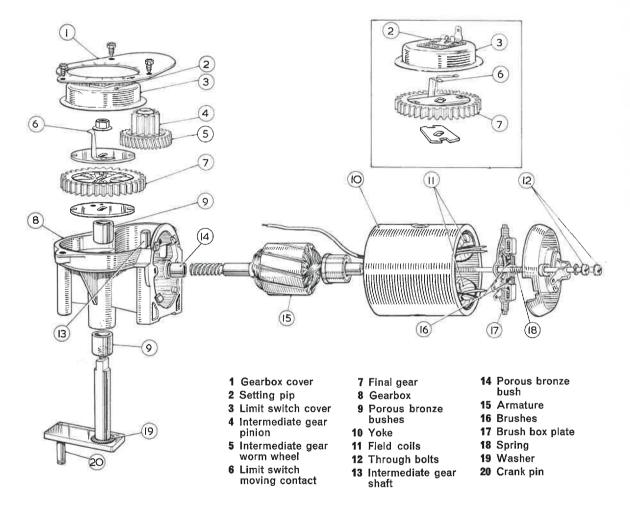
Windscreen Wiper Motor Model 5W, showing (inset) alternative components for insulated return motors
